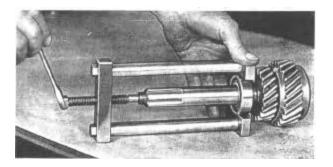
Removing Main Drive Gear Bearing—J-782 Bearing Puller
